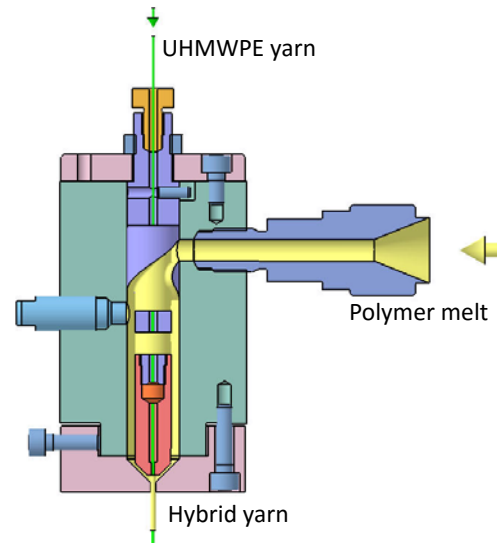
Schematic of wire coating die used for the overjacketing extrusion of an UHMWPE yarn.
